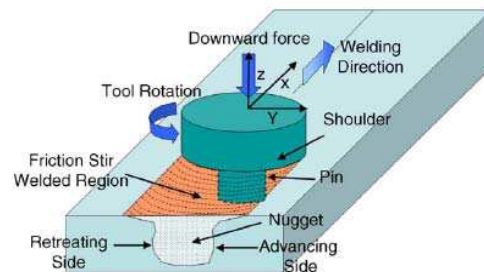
Schematic illustration of Friction Stir Welding
